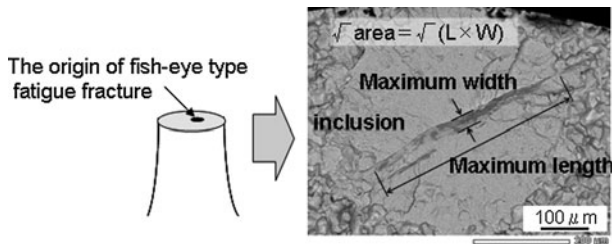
Determination of the morphology of the origin of fish-eye type fatigue fracture.
